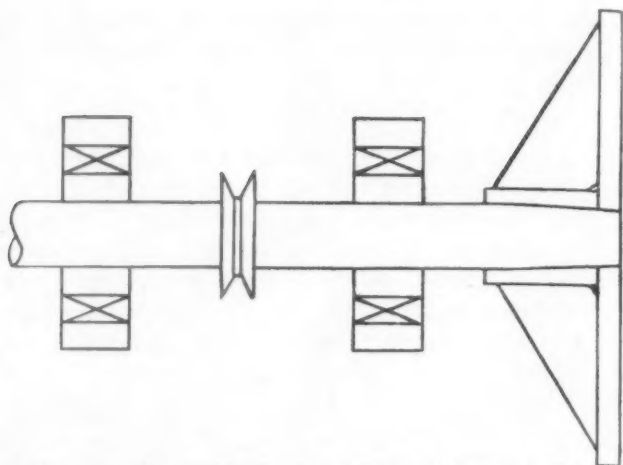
VIEW OF CENTRIFUGAL CASTING MACHINE SHOWING SPINDLE MOUNTING. THIS TYPE OF UNIT IS USED FOR CASTINGS WEIGHING UP TO 1200 LB.
